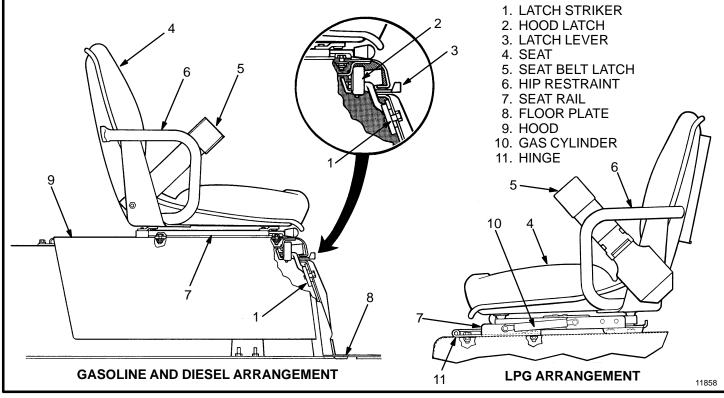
CHECK THE HOOD AND SEAT LATCHES
